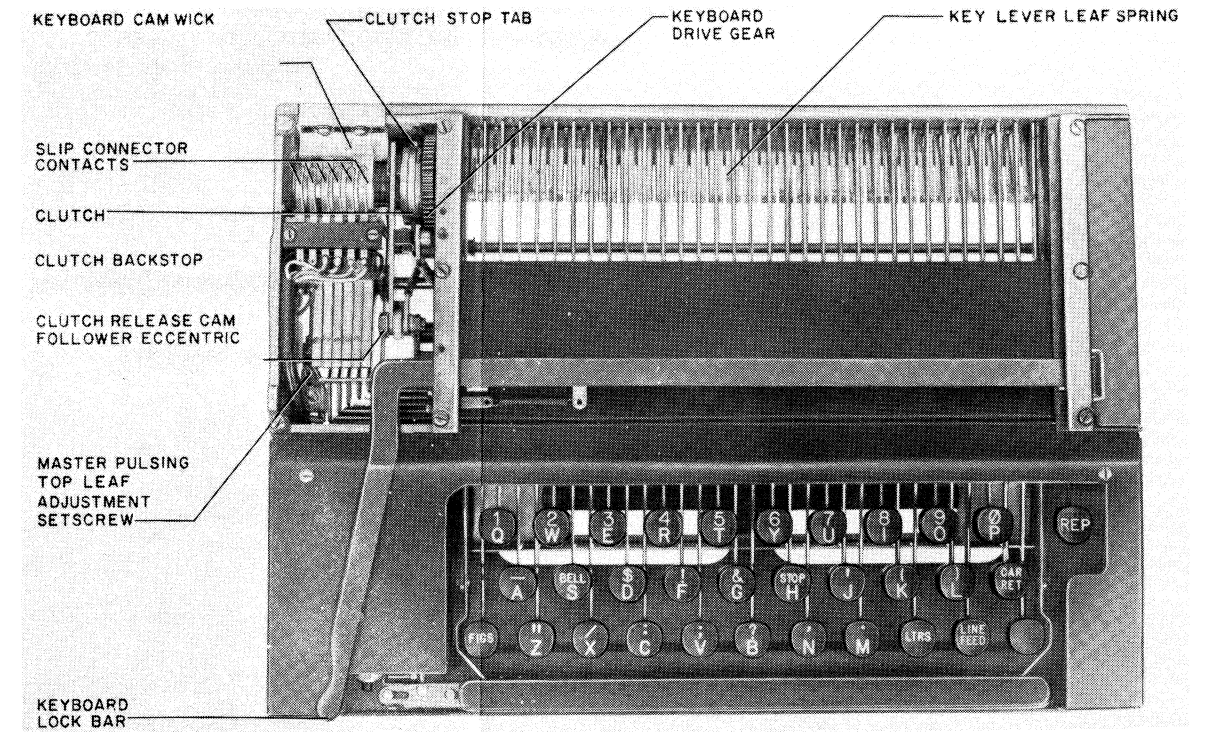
Keyboard Assembly, Top View (TT-318A/UG)
